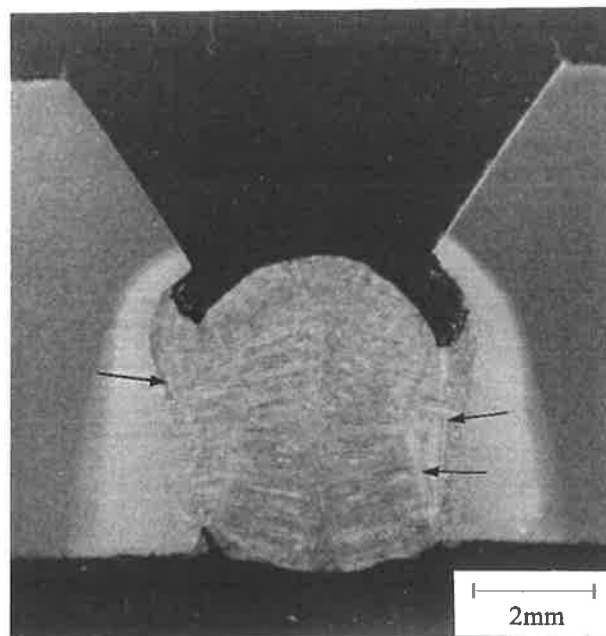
Macrograph of a weld cross section etched in 2% nital. Welding conditions: a weld travel speed of 530mm/min, welding current 185A and welding voltage 32V, root gap 1.2mm and root face 2.5mm.
